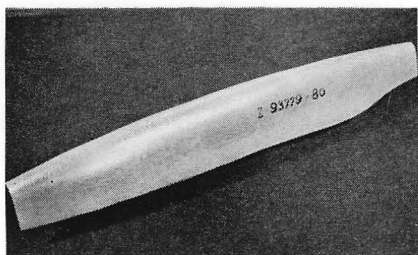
How refinement of design improves production. The wing tip shown above was originally made in soft aluminium in two halves on a drop hammer and welded together. Fig. 8 illustrates the new method
